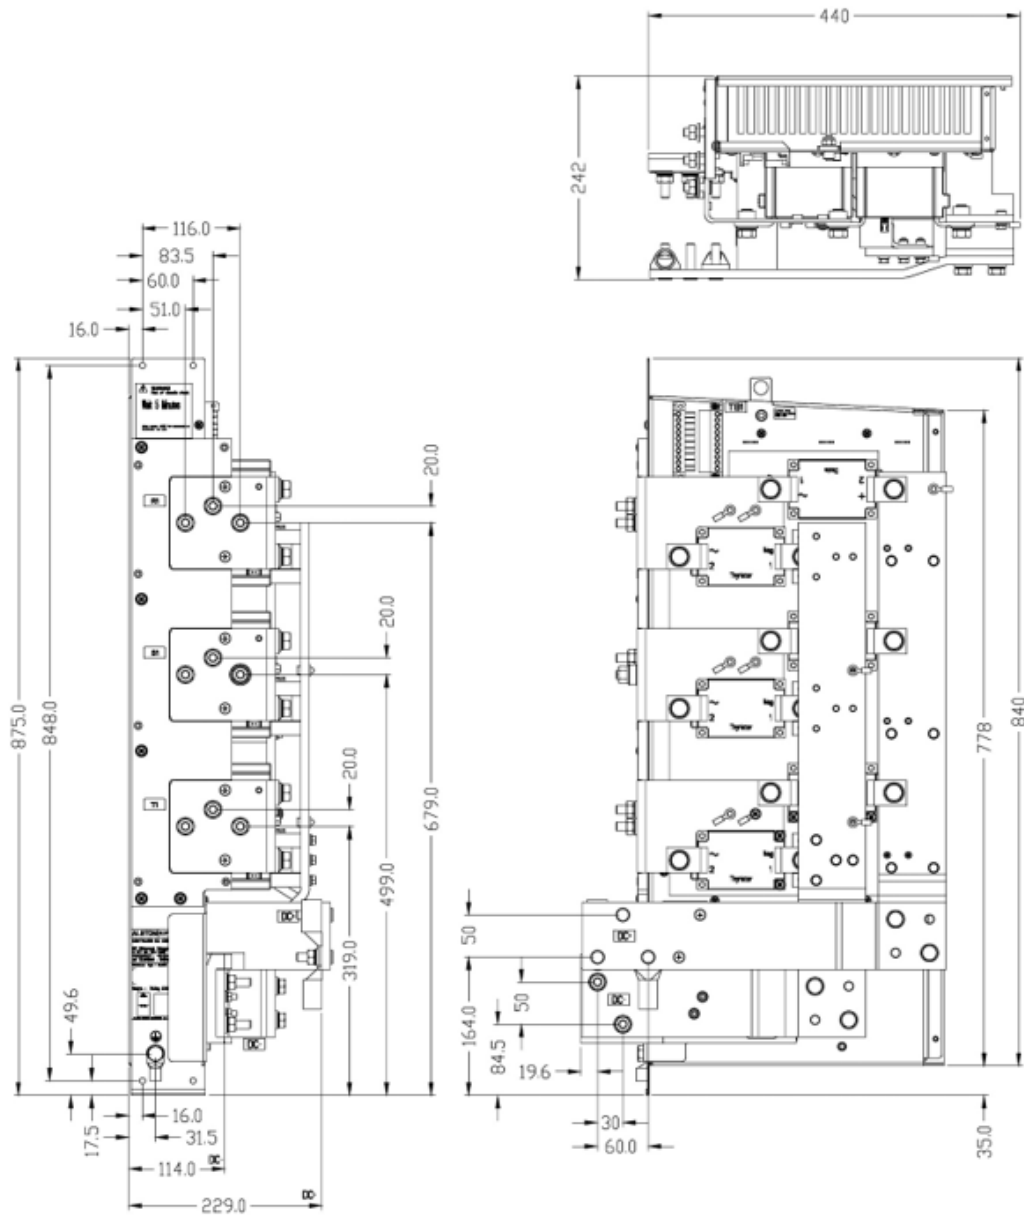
Cubicle Busbar Assembly for GDR721
